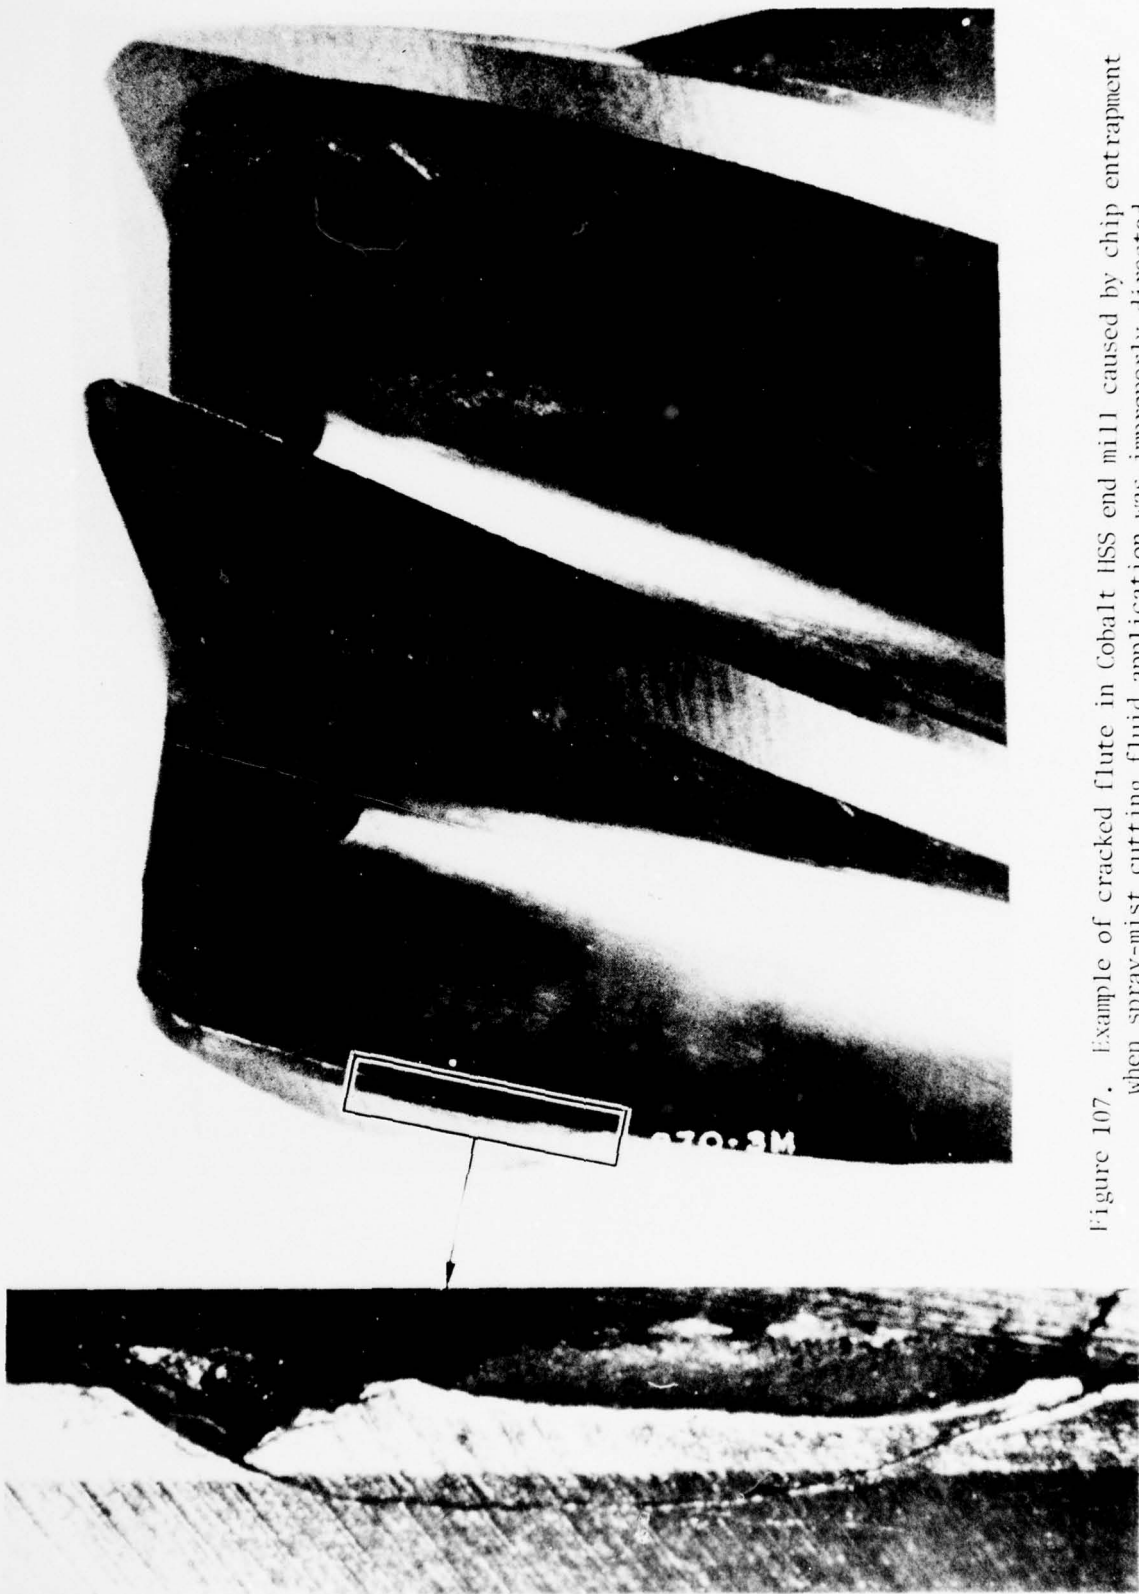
Example of cracked flute in Cobalt HSS end mill caused by chip entrapment when spray-mist cutting fluid application was improperly directed.
